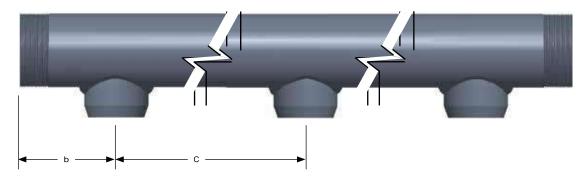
TYPICAL MANIFOLD ASSEMBLY: Part No. 300012
